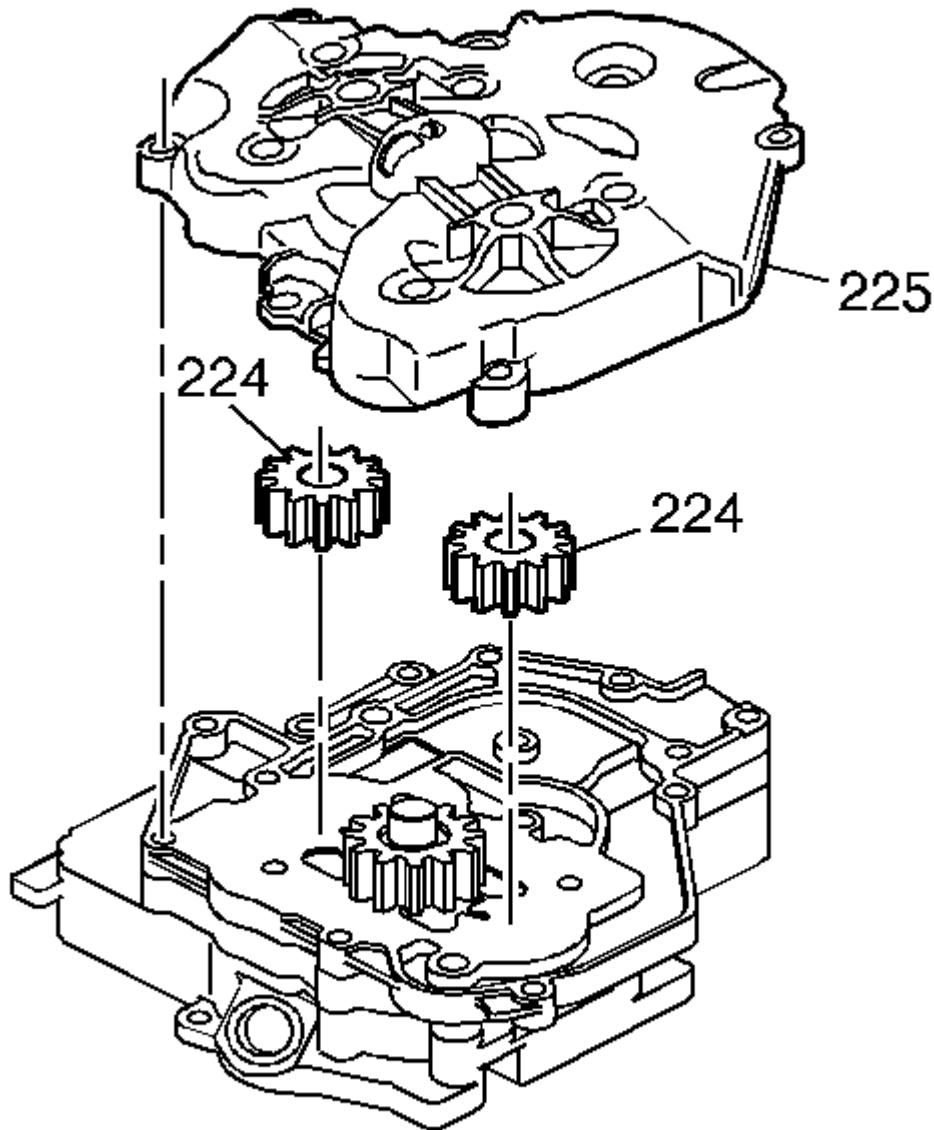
View Of Scavenge Pump Driven & Drive Gears
